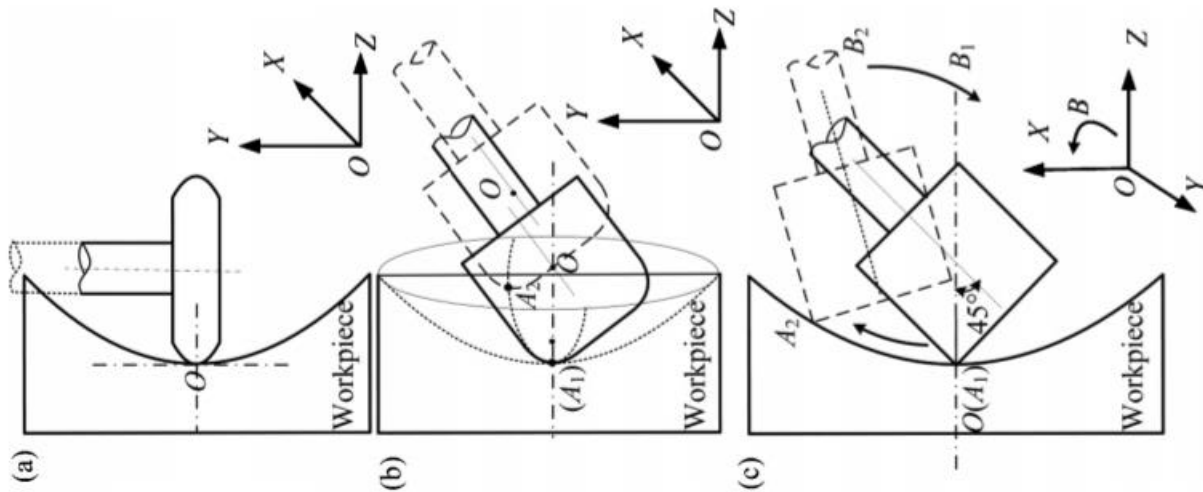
Grinding methods: (a) perpendicular, (b) inclined axis (arc wheel), and (c) single point inclined axis [10]
